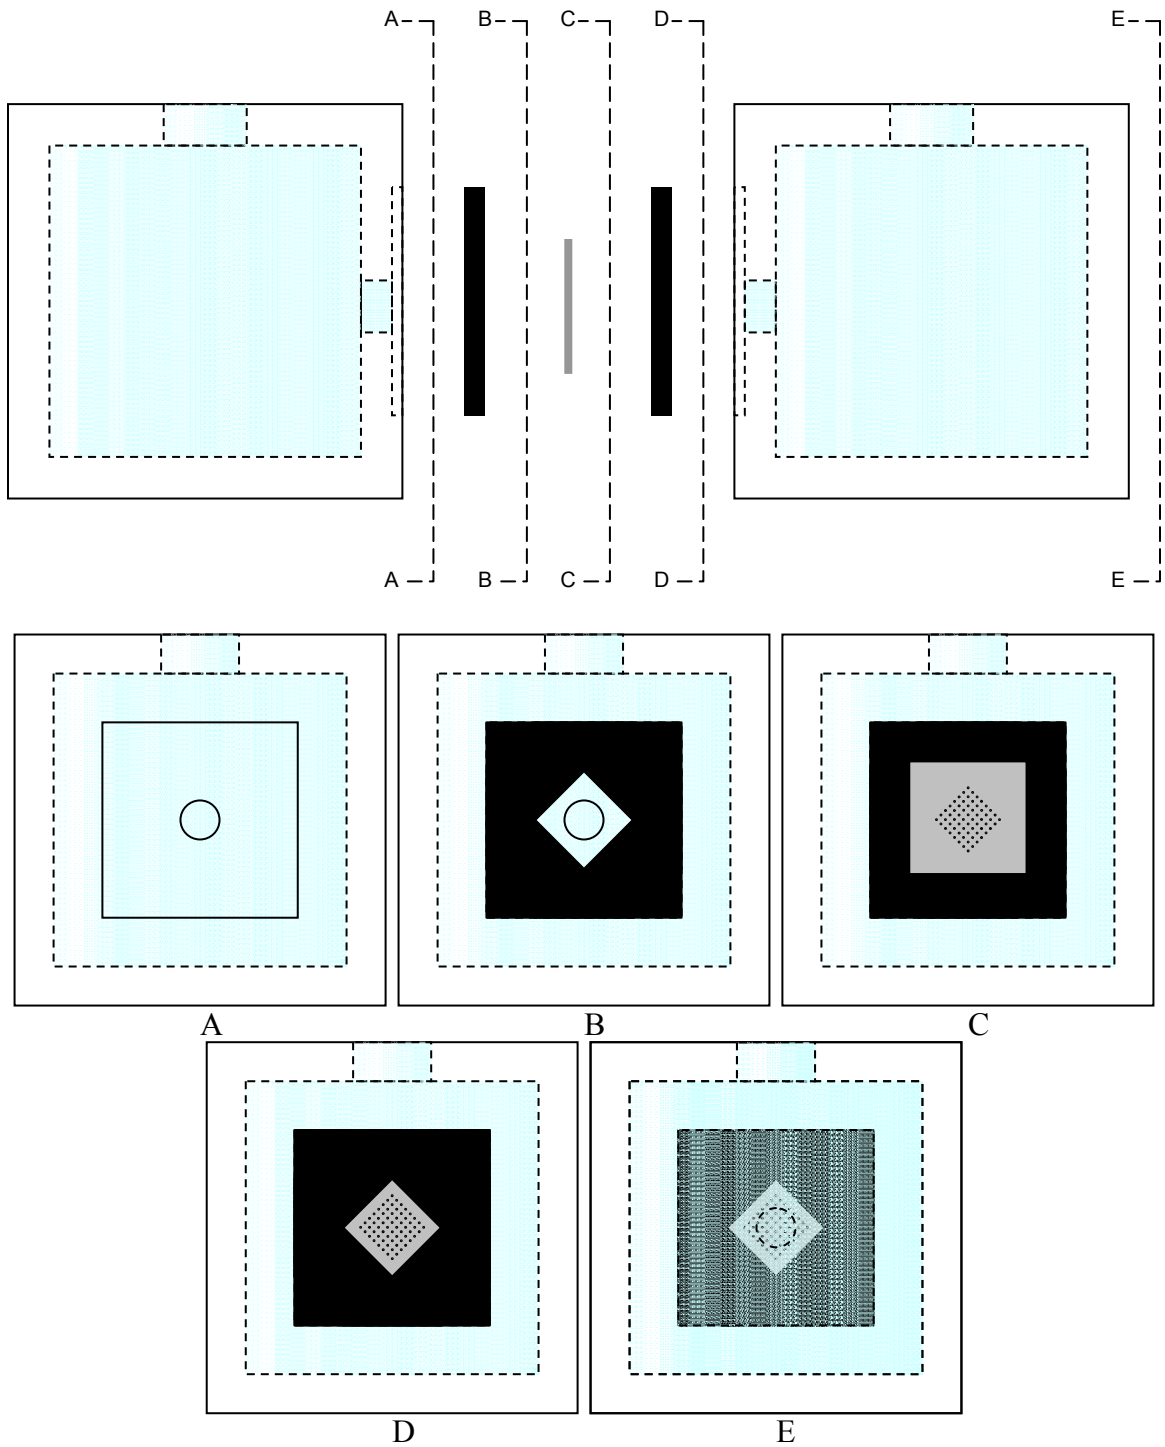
The reservoir assembly is sectioned out (above) views A-E and the cross-sectional cutaways are show (below). (A) Shows the “in-flow” reservoir, a rubber seal is in place in (B), the microchannel array is added in (C), in (D) the other rubber seal sandwiches the array, and in (E) the “out-flow” reservoir is put into position.
